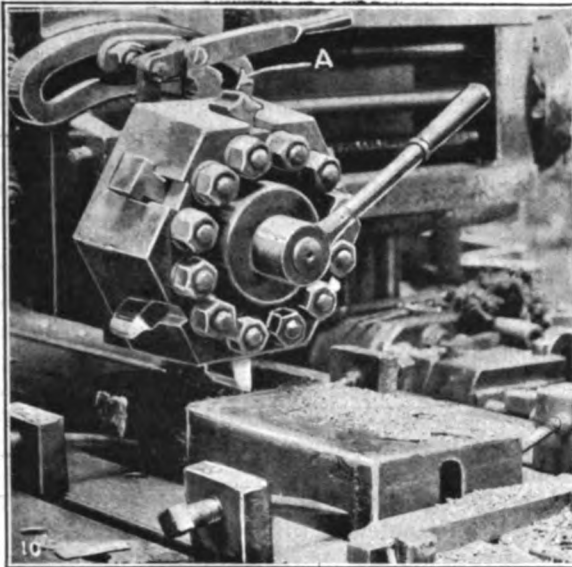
TURRET MOUNTED ON PLANER HEAD. FIG. 11—BOX FOR TRANSPORTING SMALL PARTS
